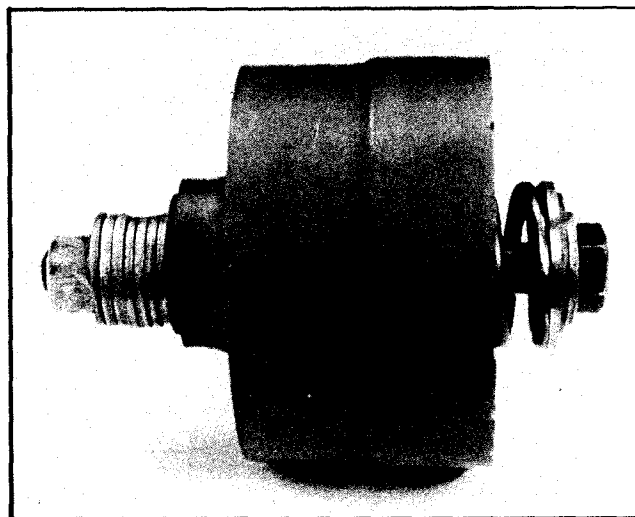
Cylinder block subassembly disassembly tool. (Tighten nut, remove snap ring, loosen nut to relieve spring tension).
